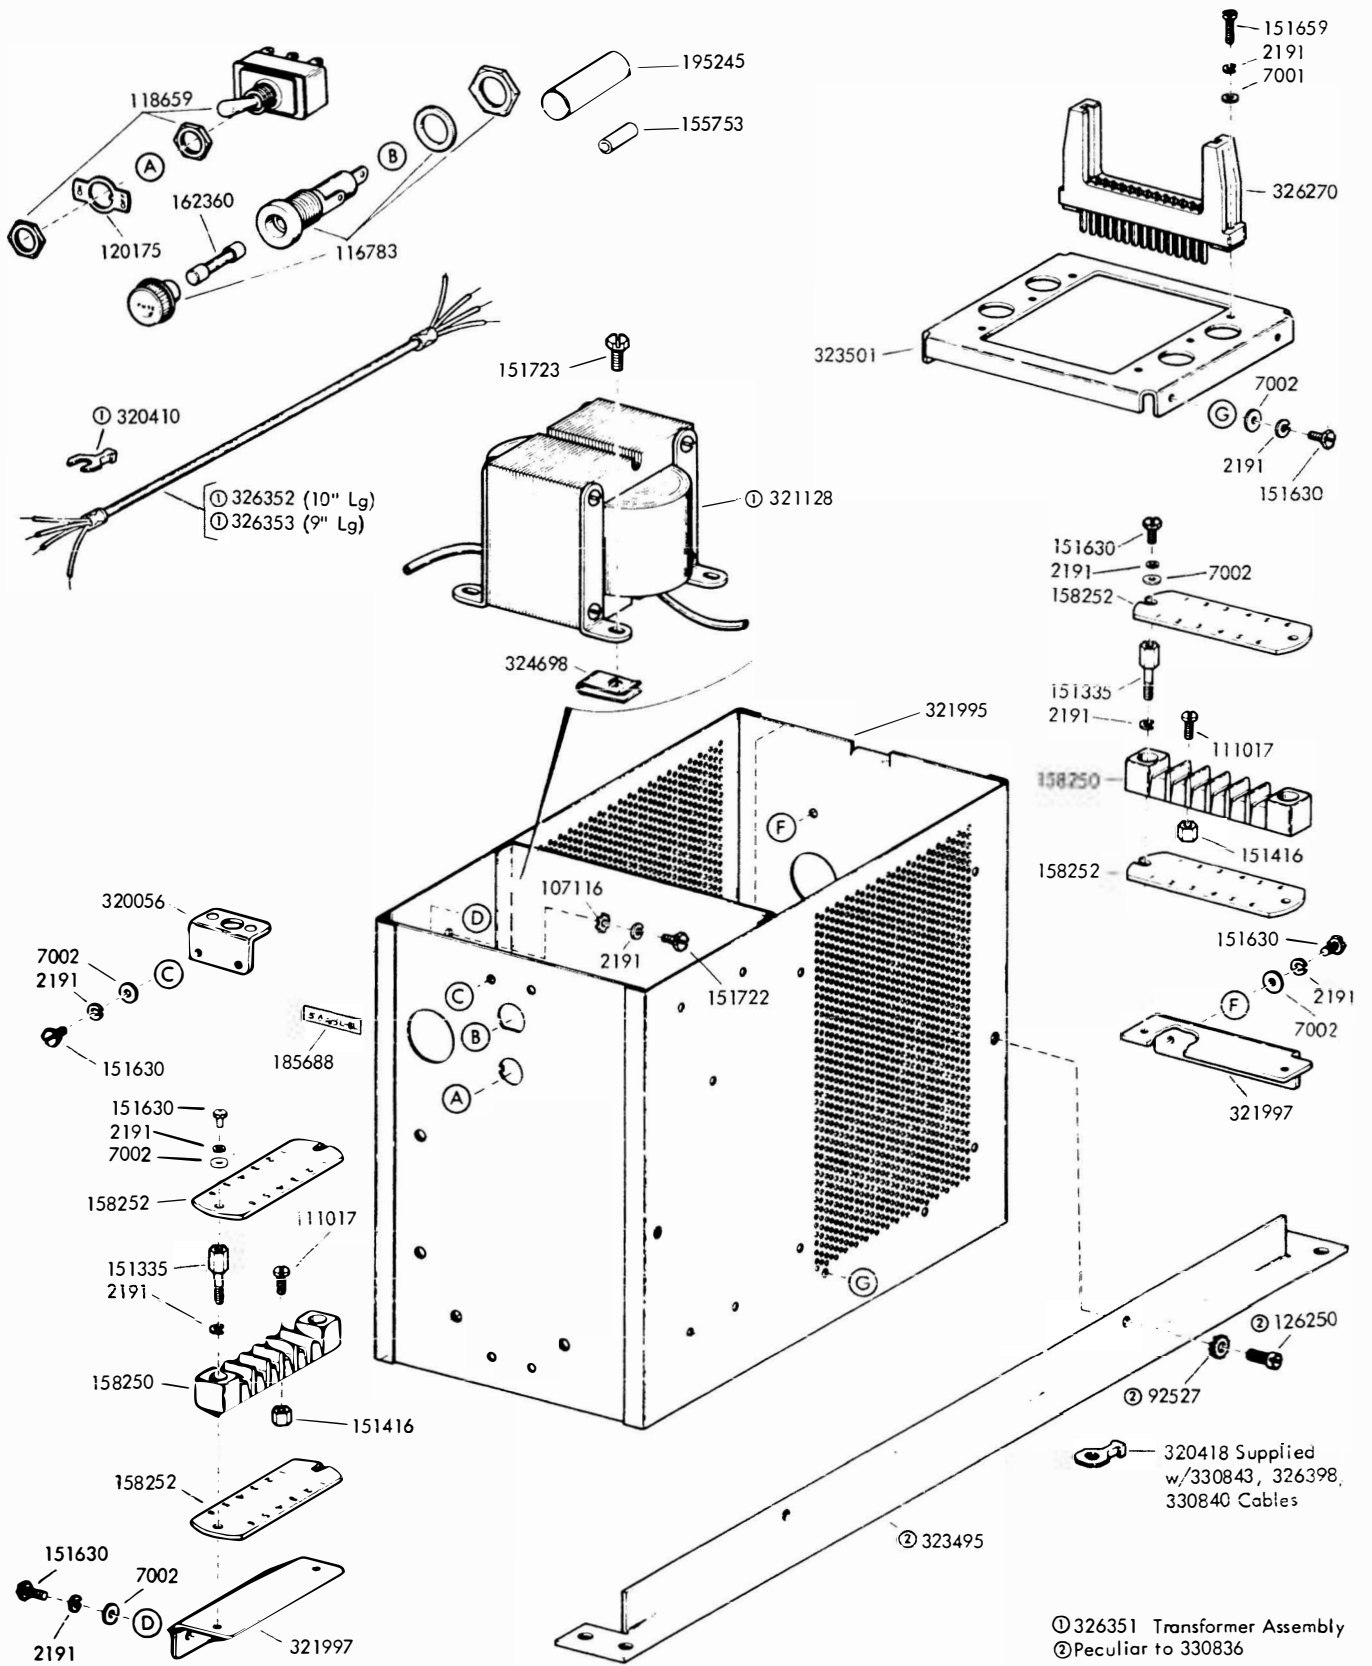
330836 and 333523 ELECTRICAL SERVICE ASSEMBLIES -
